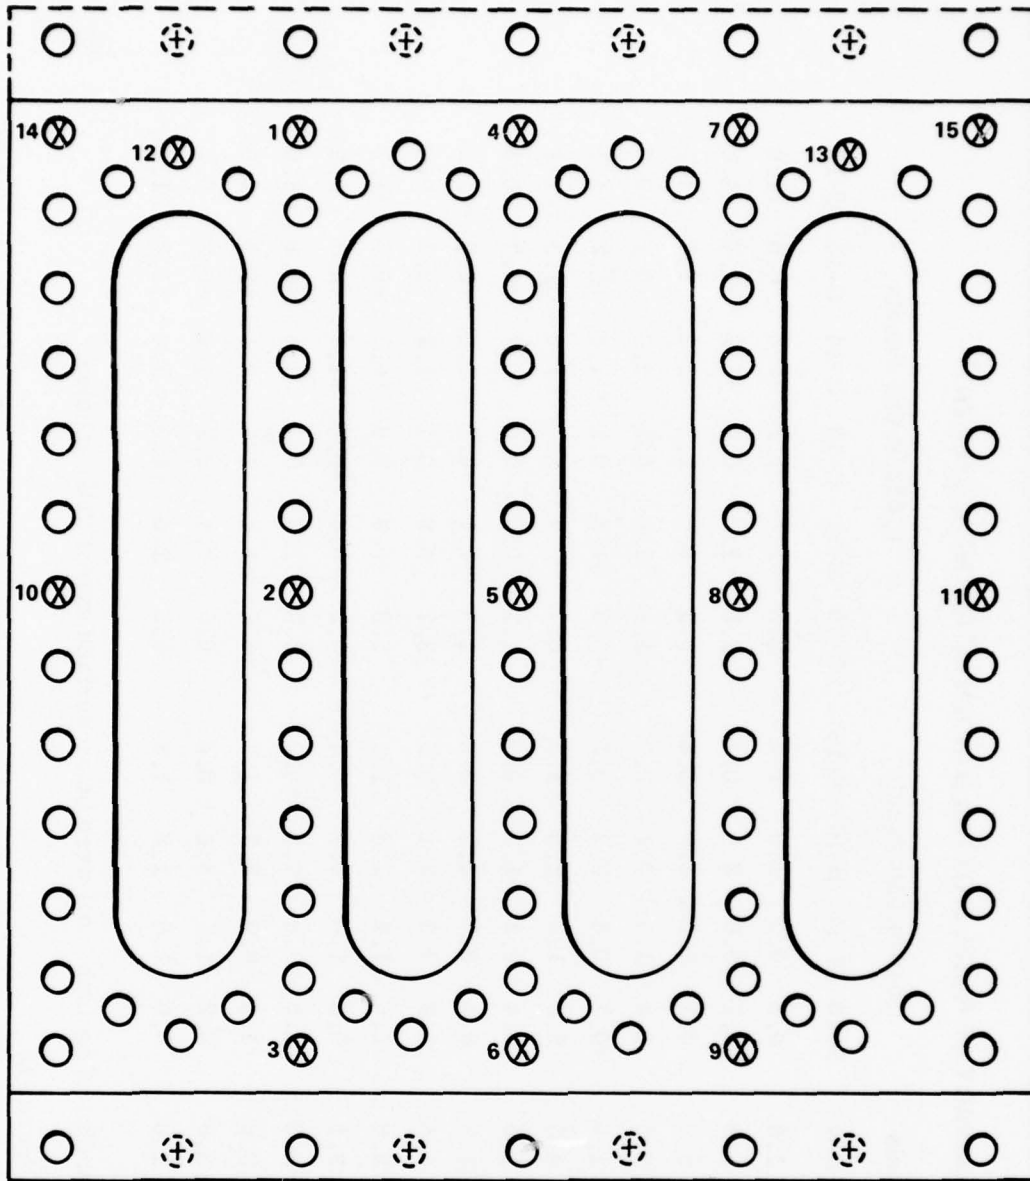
LOCATION OF SPOT MEASUREMENTS WELD INDENTATION
